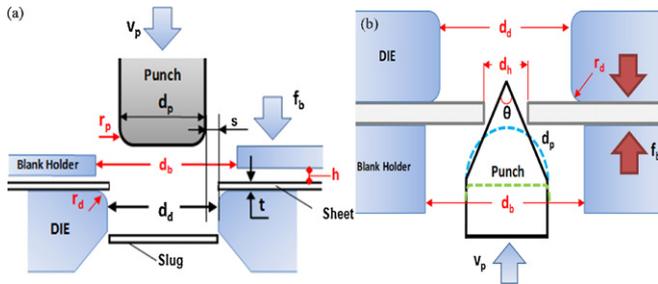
Schematics of (a) blanking and (b) hole expansion (flanging).
